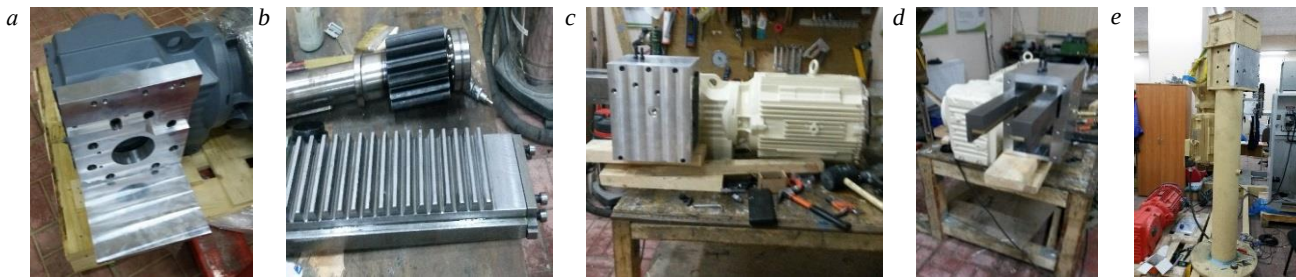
Stages of assembling a linear rack-and-gear drive (SRPU)
